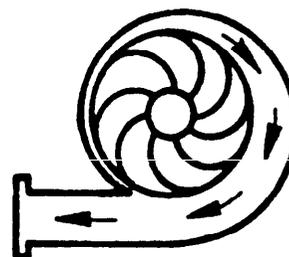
Section showing impeller and volute of a centrifugal pump.
